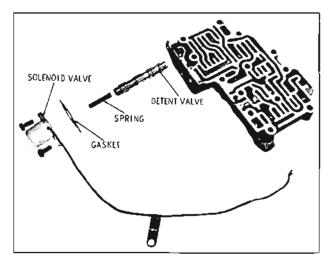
Removing Detent Solenoid and Detent Valve
